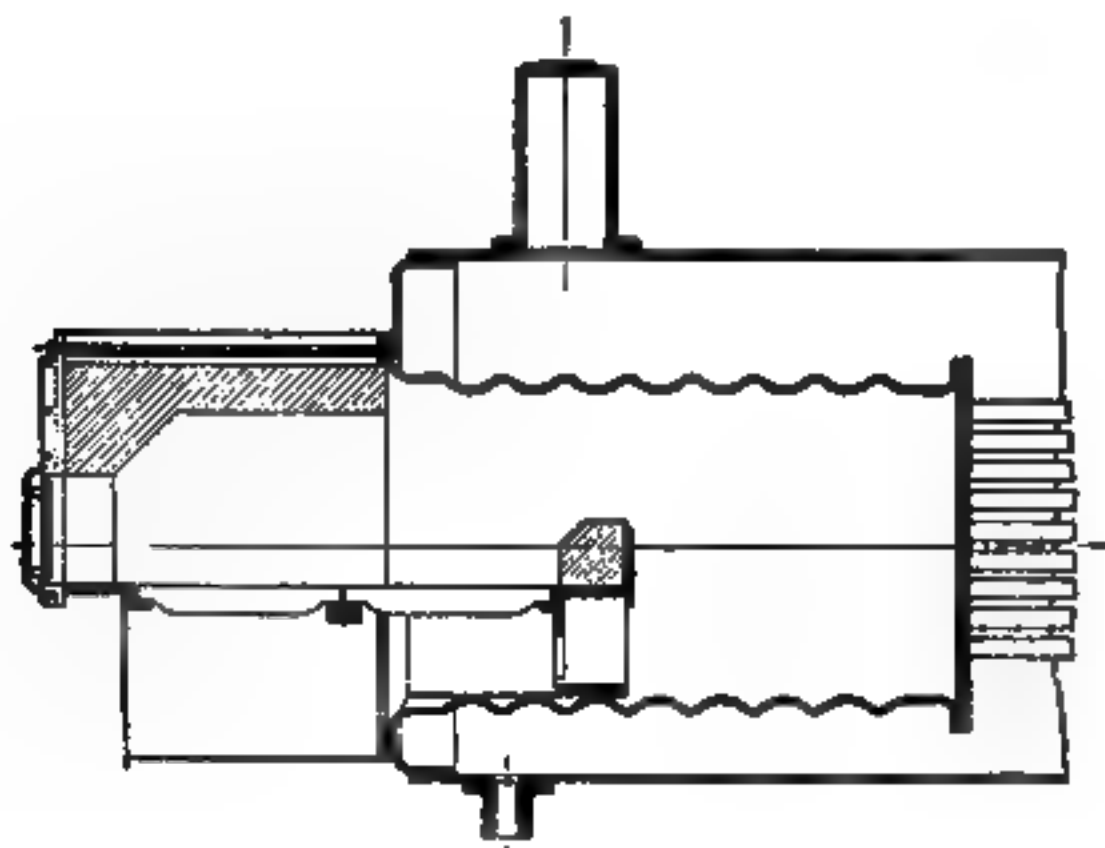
,424.—Sectional view showing Buckeye-mobile extended furnace construction.
